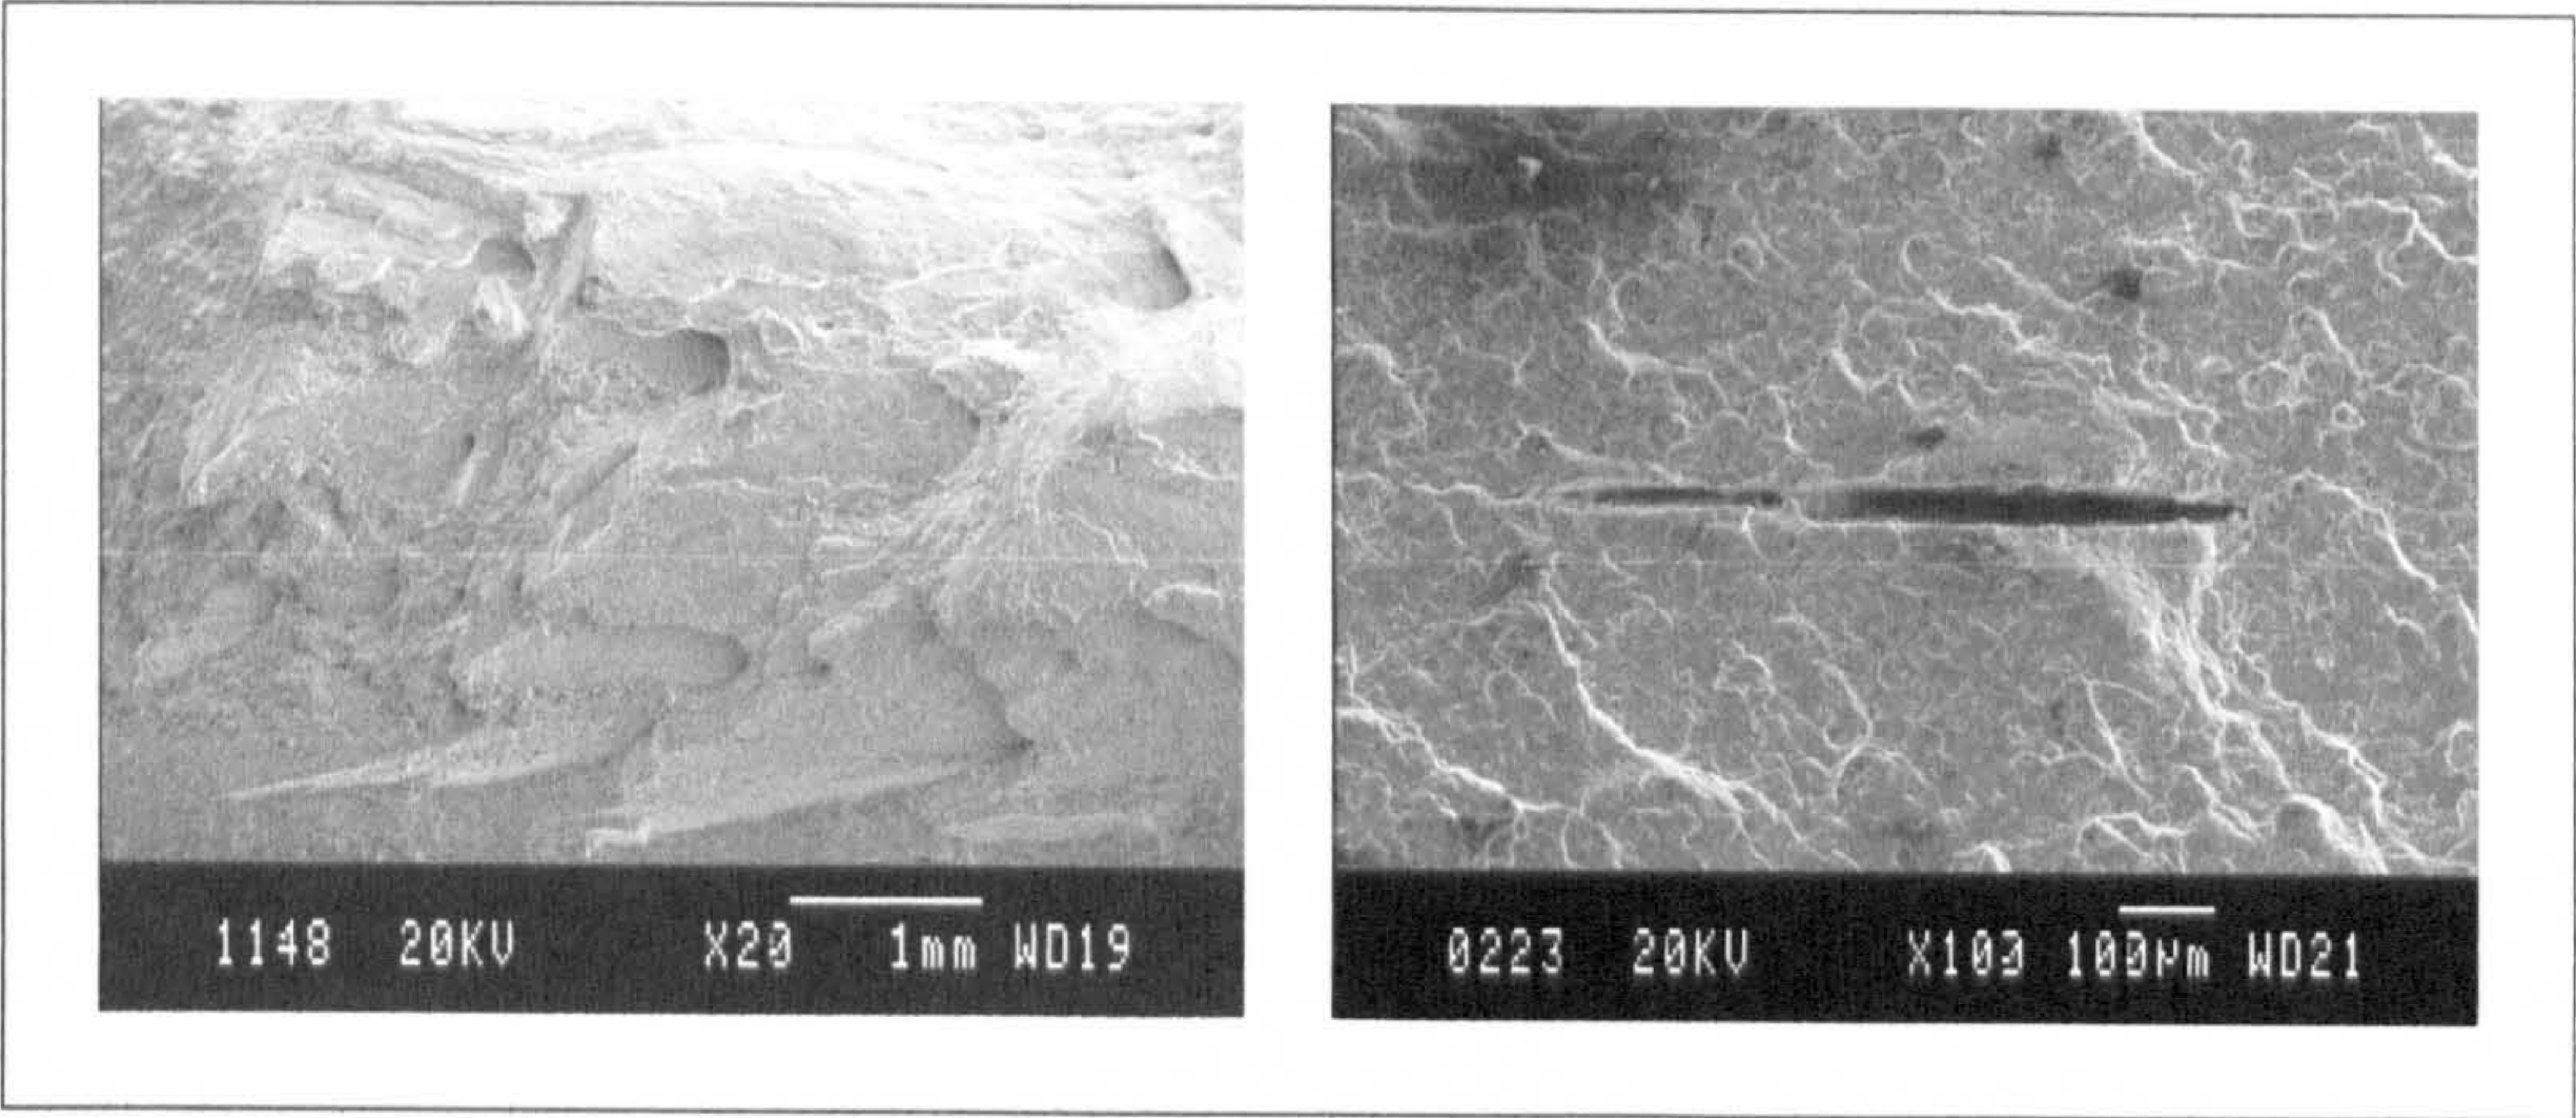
PFD observed in FS SP welds, fast fracture surface (left) and fatigue fracture surface (right).
